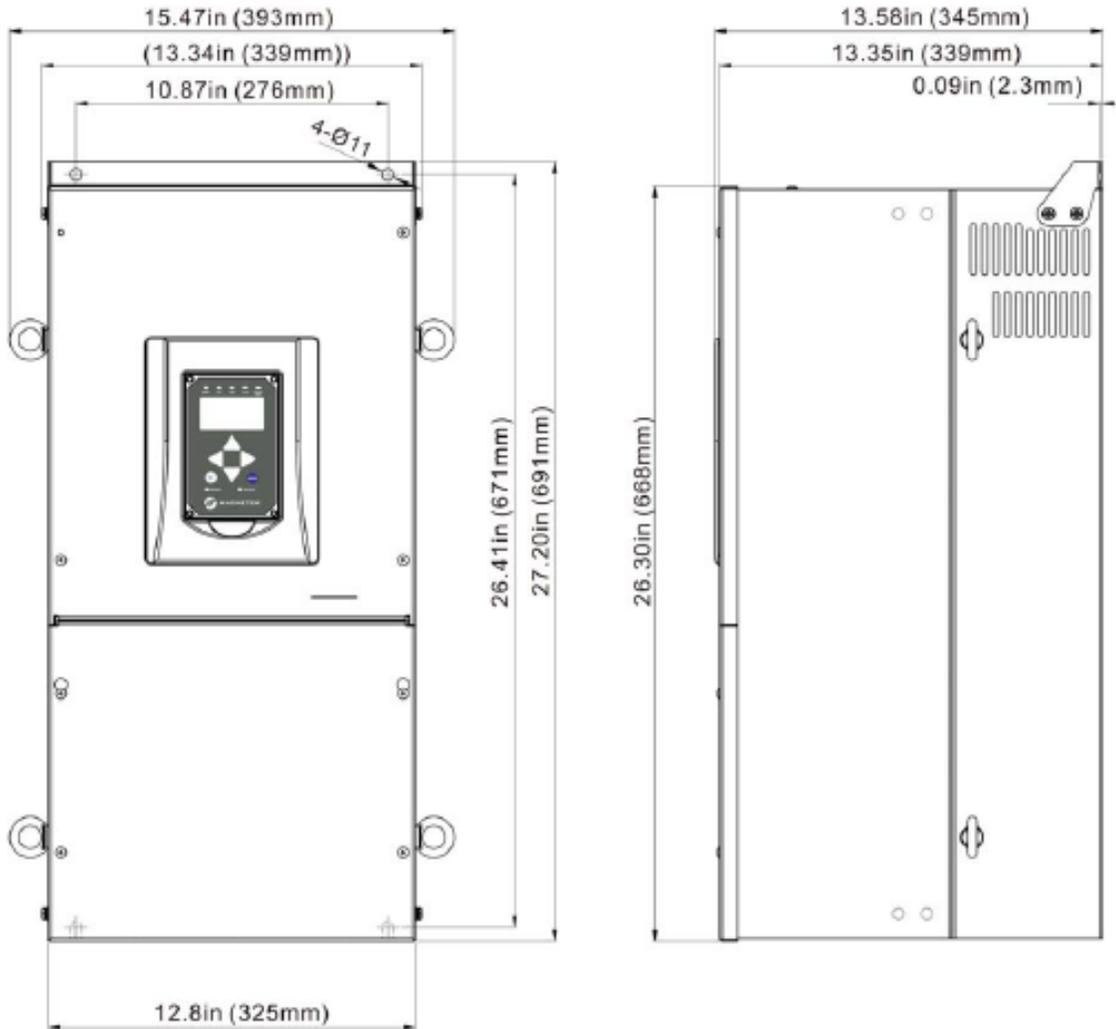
Frame 3.5 Dimensions, Mounting Holes, and Weight
